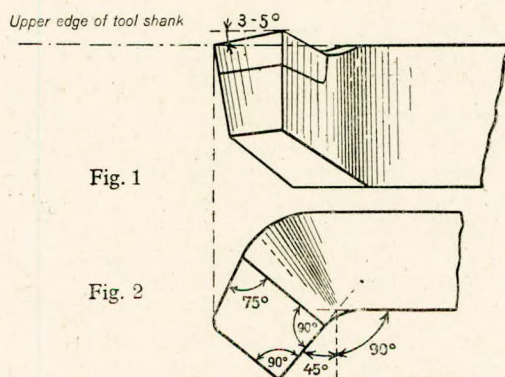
A new cutting material. Tungsten carbide (Widia) tipped tools. Fig. 1 showing side rake to facilitate cutting. Fig. 2, bent form of tool for roughing. A. C. Wickman Ltd., Coventry.
